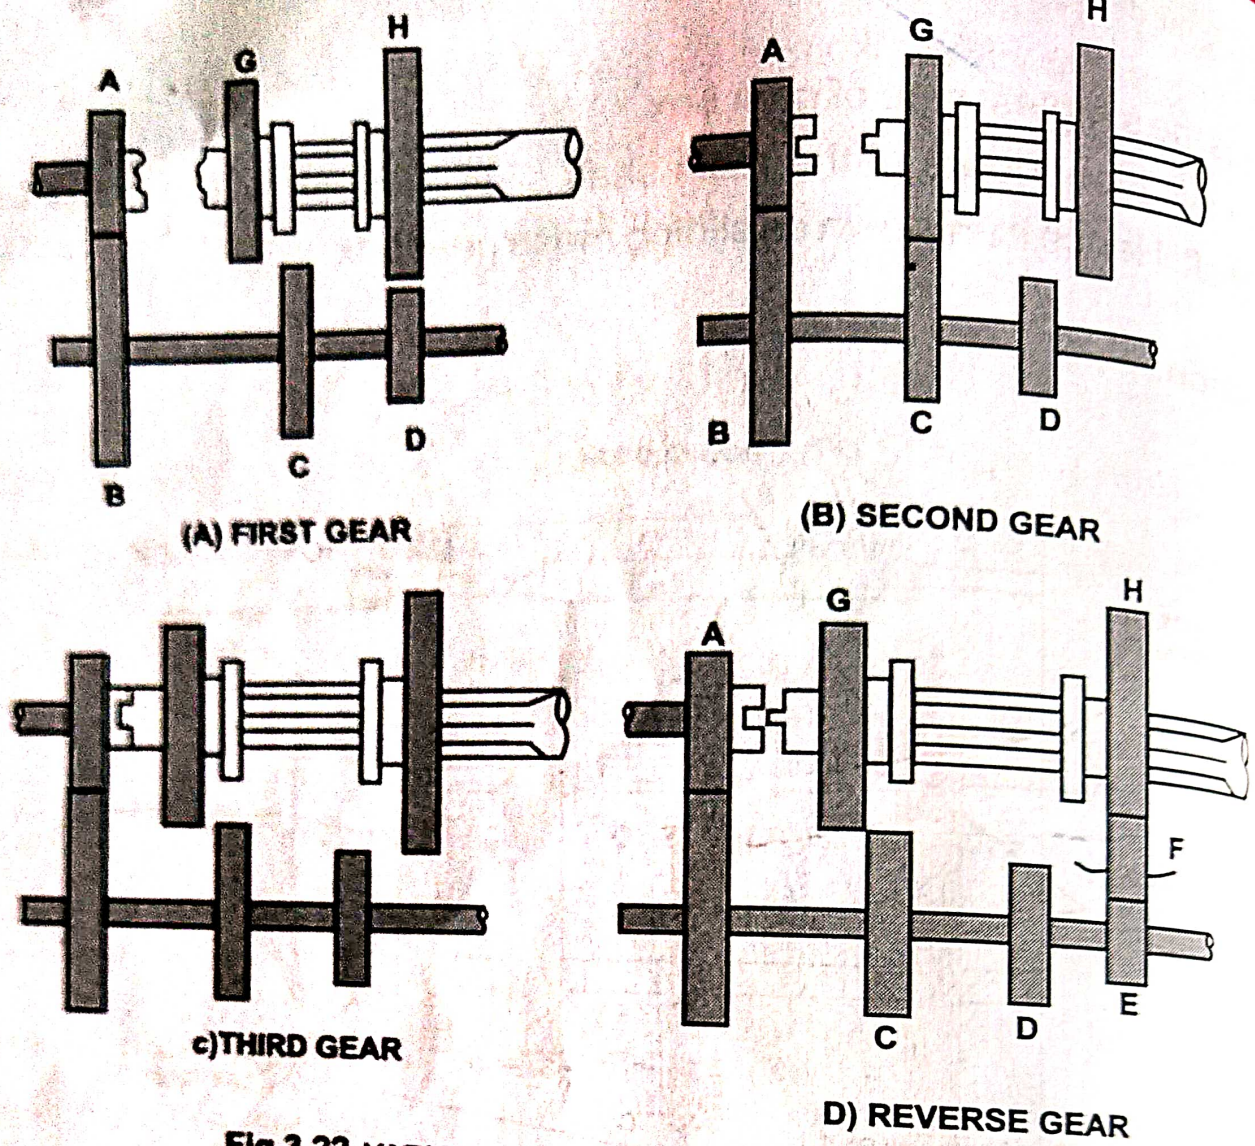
VARIOUS GEAR ENGAGEMENT
